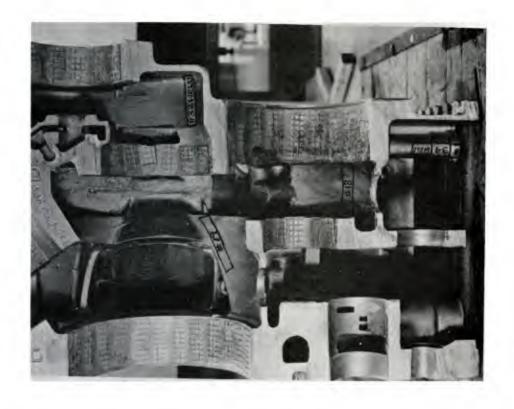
MACHINED TEST BAR LOCATIONS FOR HLH COMBINER HOUSING SECTION B
